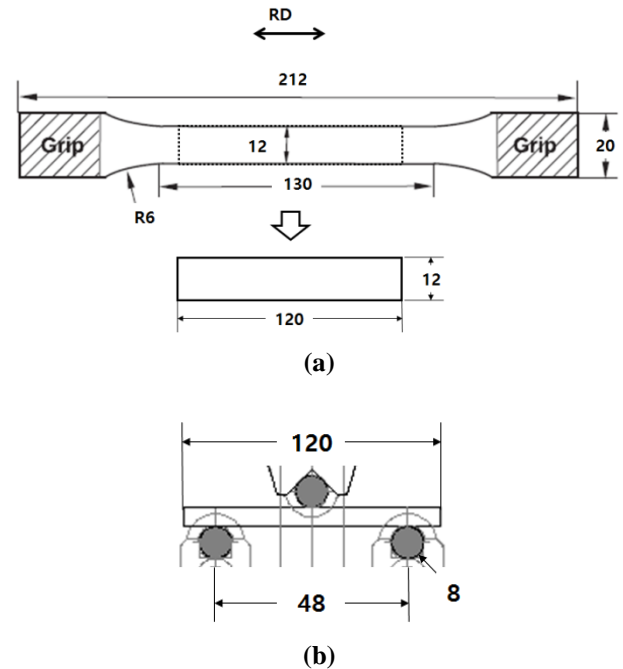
Bending of pre-strained specimens (a) tensile and bending specimens (b) three-point bending fixture
